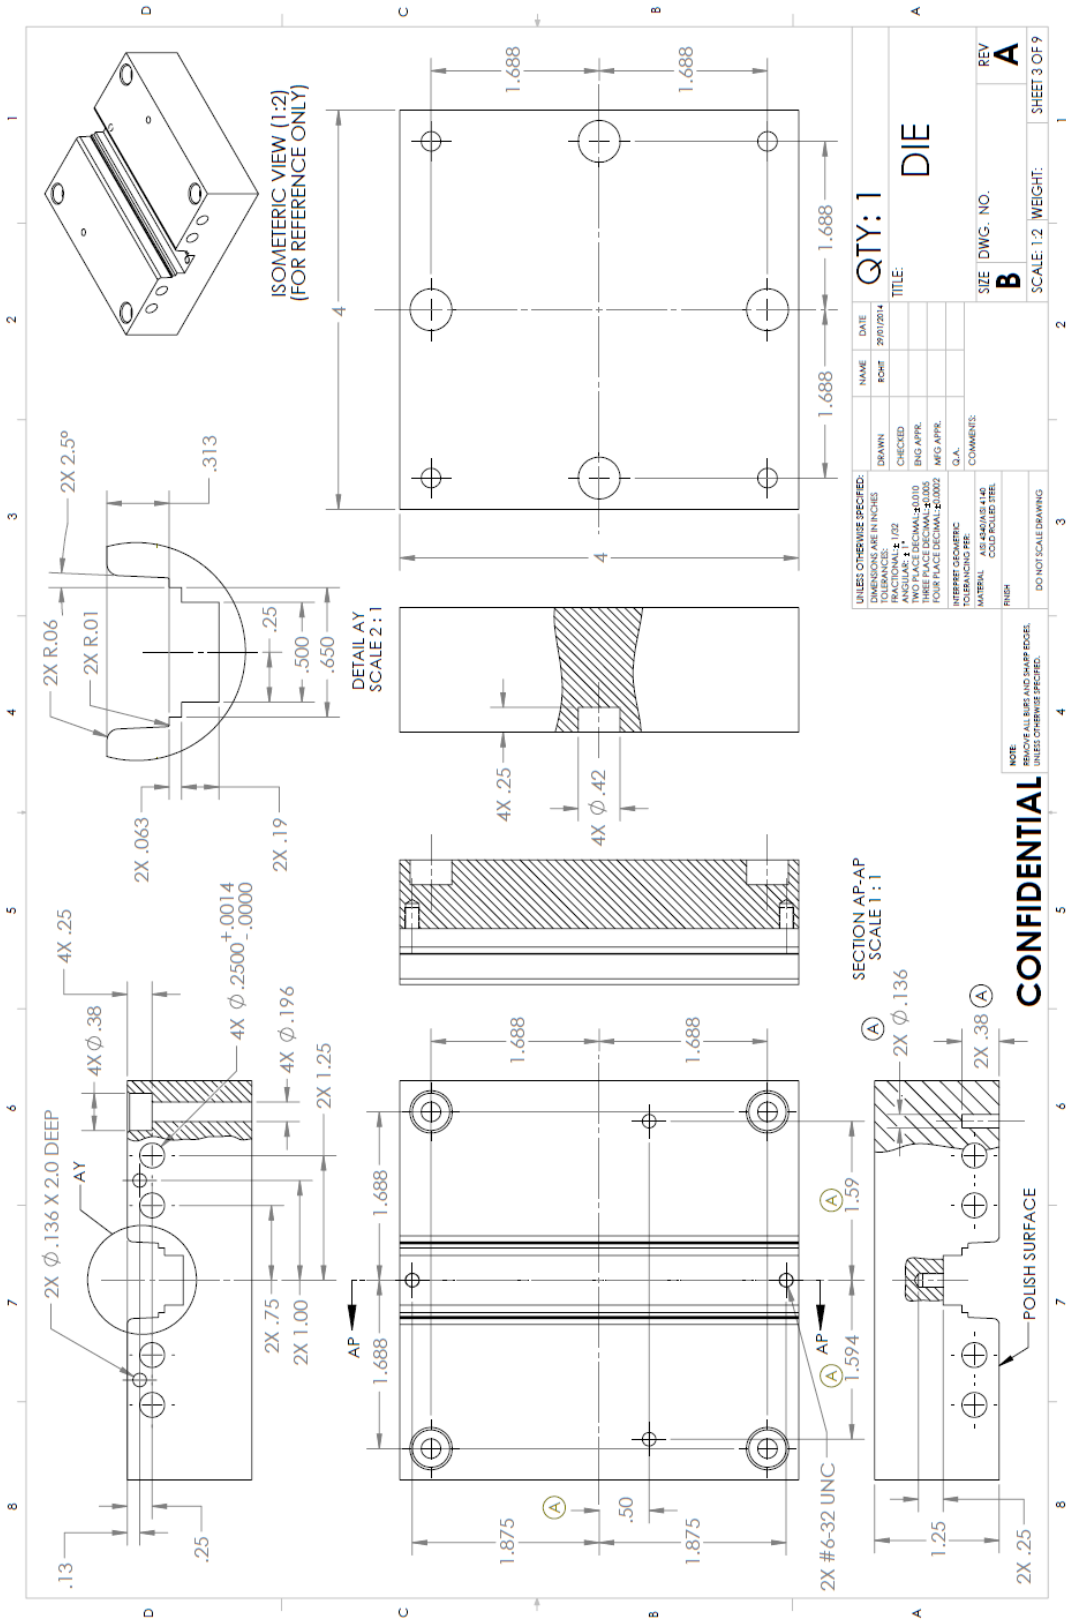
Detailed drawing of the die used in the comprehensive springback study.
